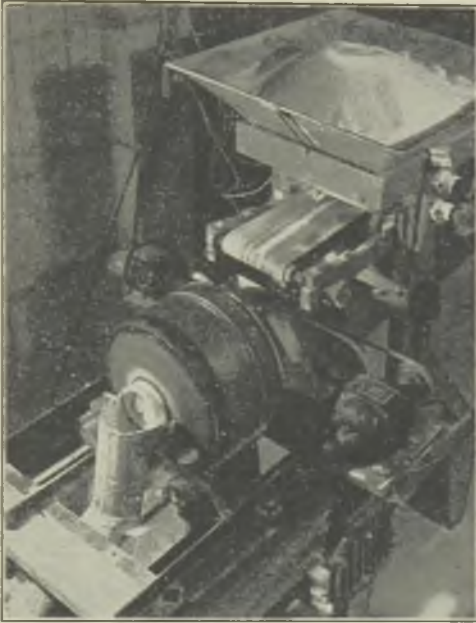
CONTINUOUS MILL FOR TESTING THE RESISTANCE OF BALLS TO ABRASION.
